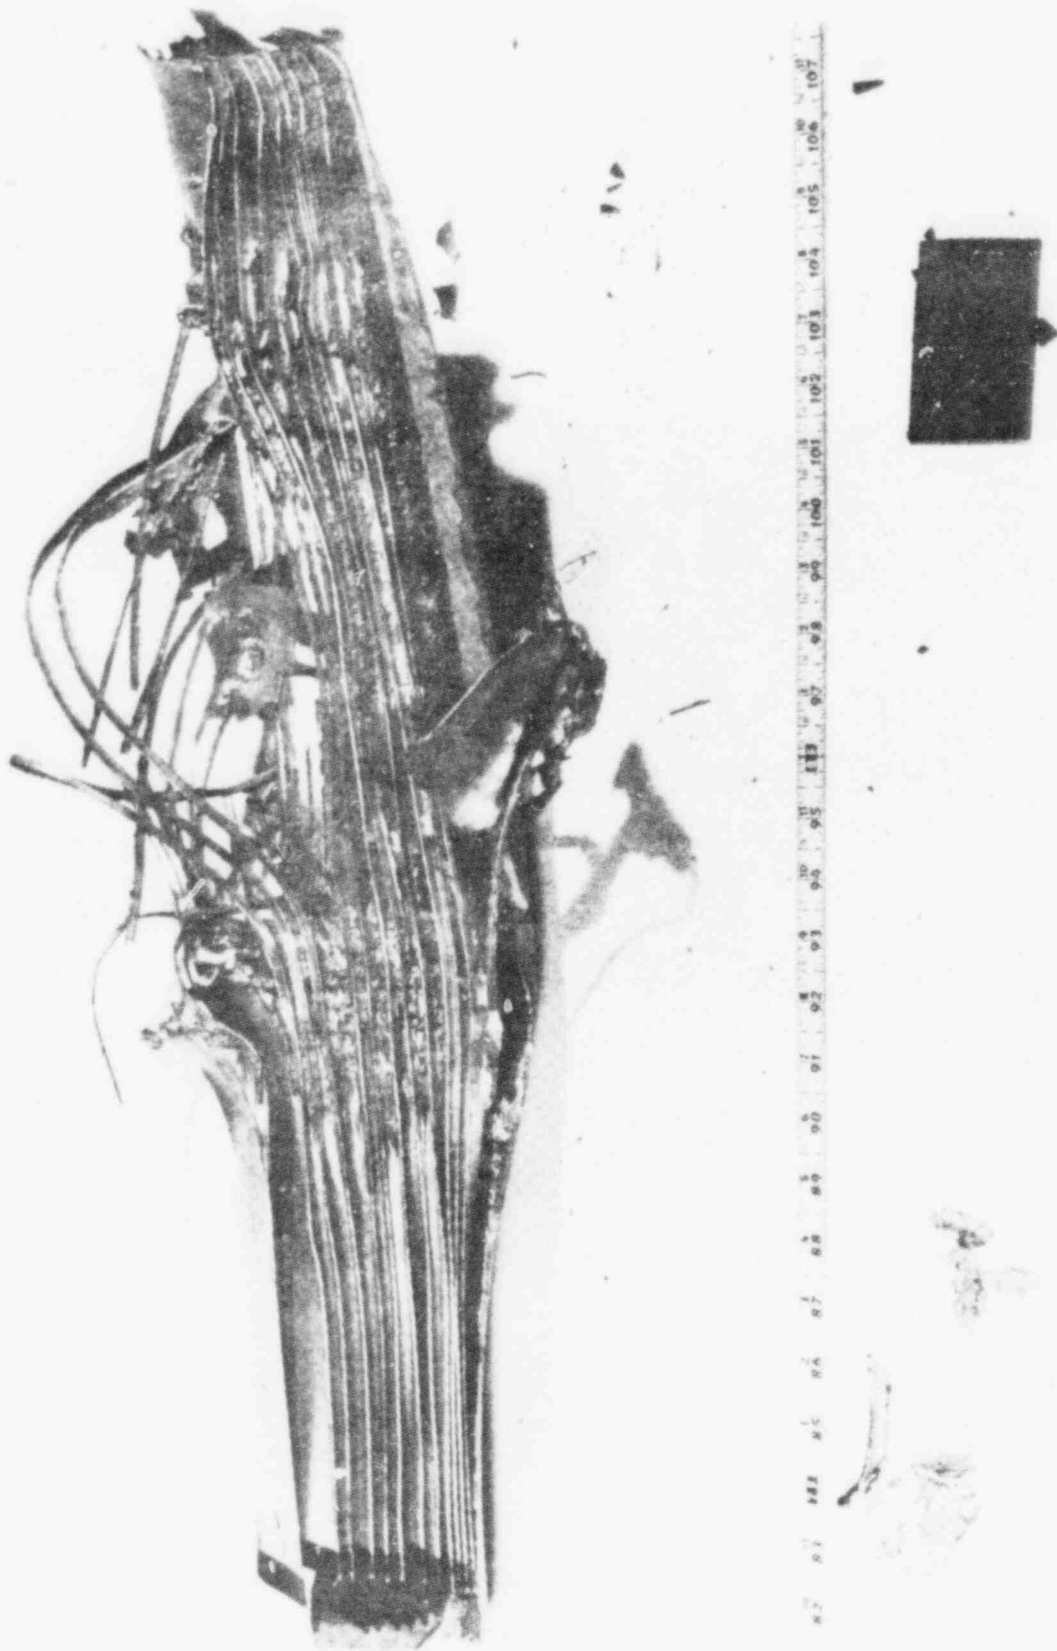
Typical plates from peripheral assembly-edge view, position G6.
